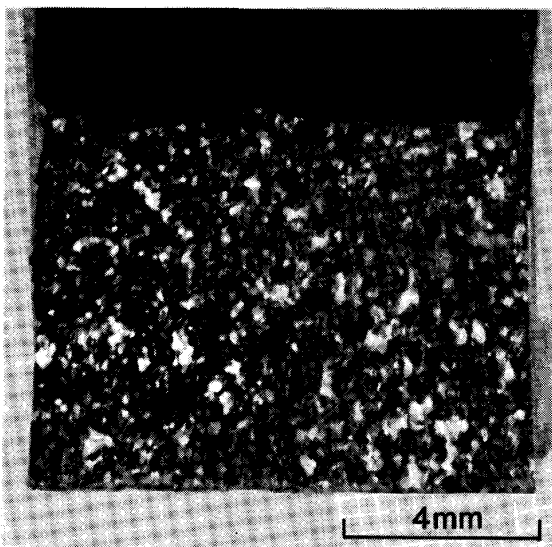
Optical macrograph of Charpy fracture appearance of HT-80 steel.
